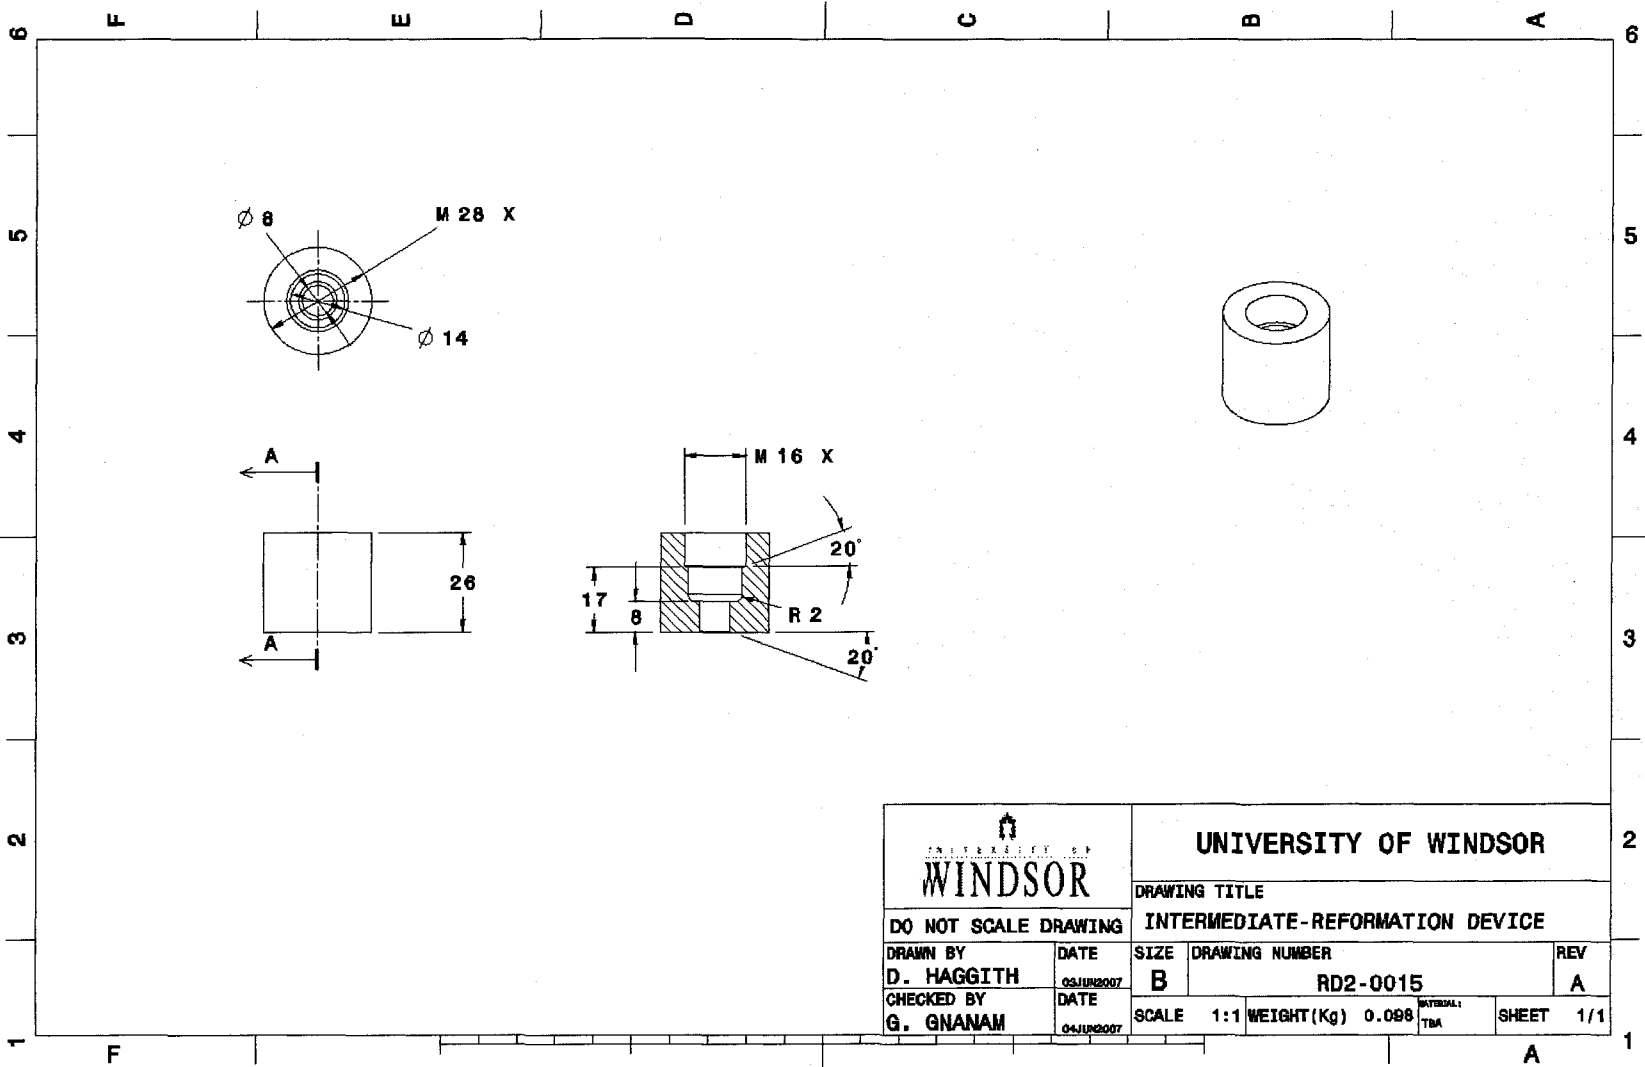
Modified intermediate base – Item 3 in assembly drawing (second proto-type).
